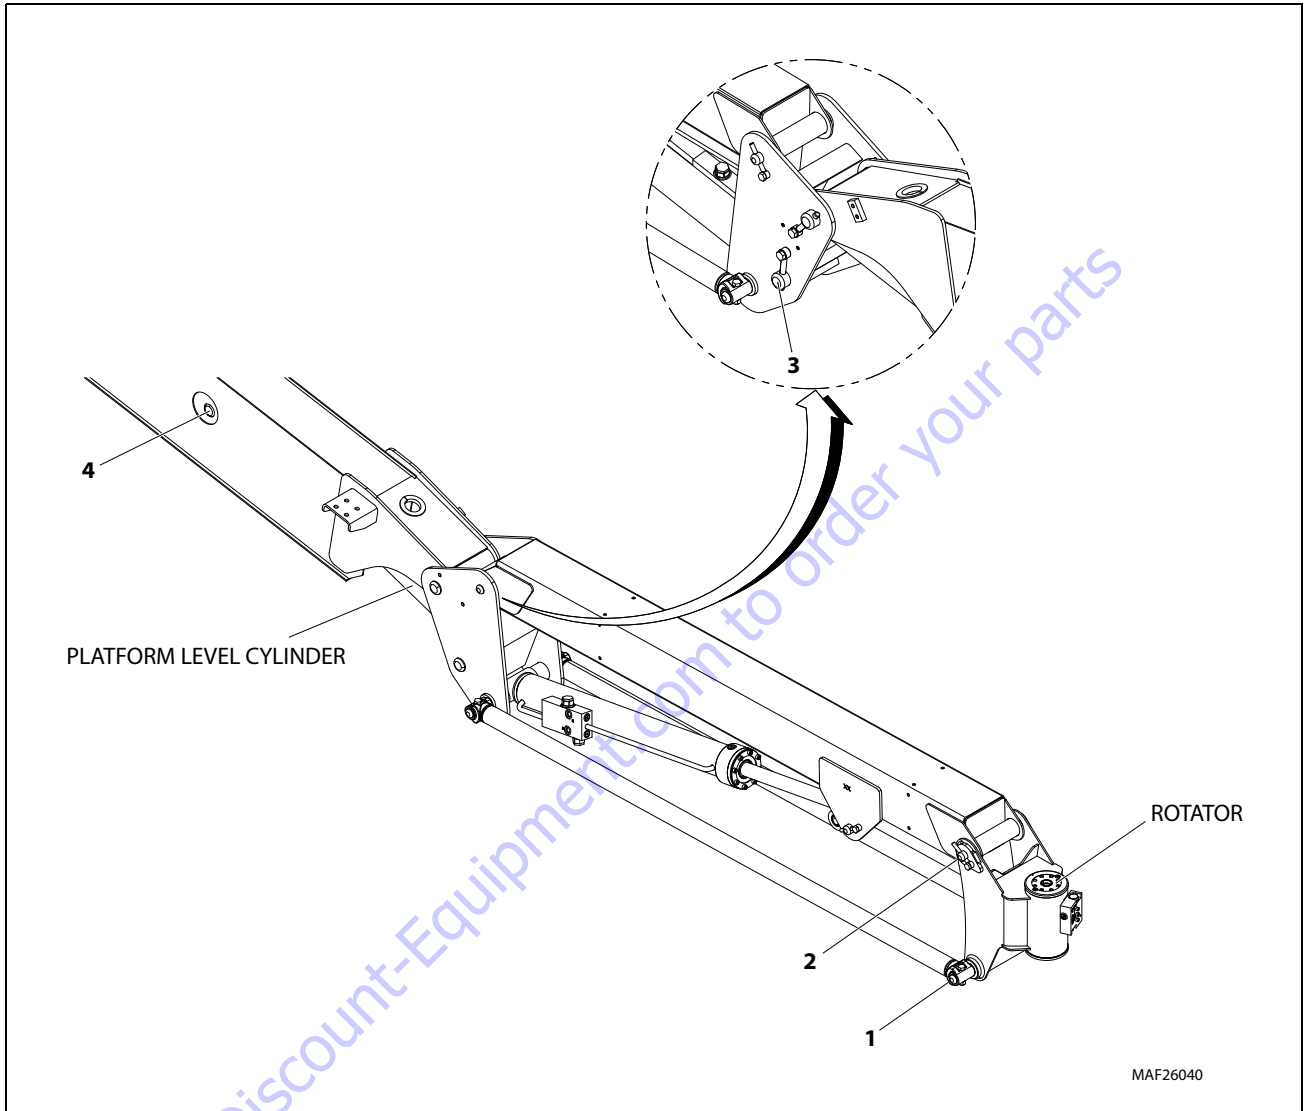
Removal of Components - Rotator and Platform Level Cylinder
